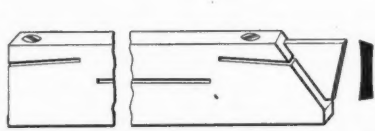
Johnson Tool-holder for Cutting-off Tool.
